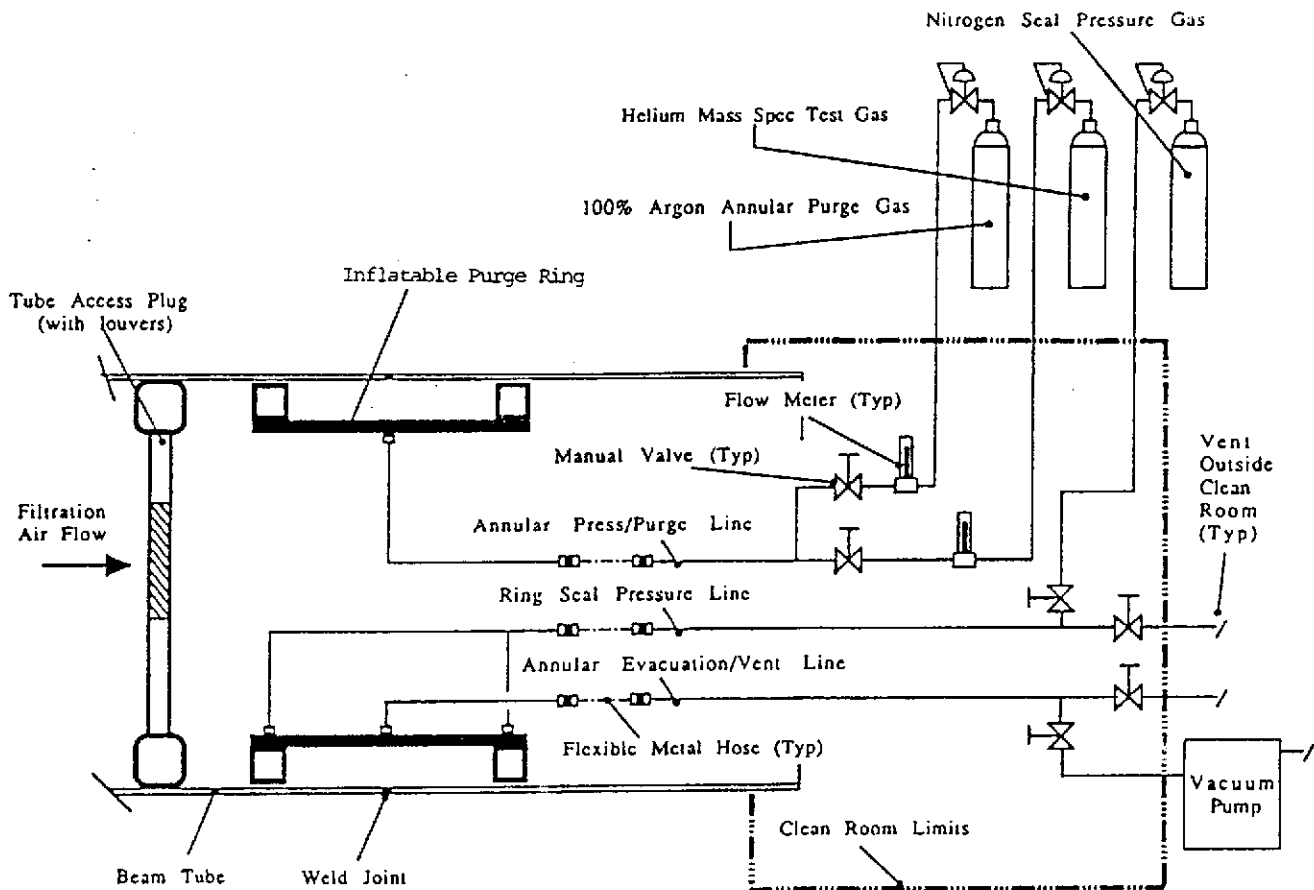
Weld Joint Purging Arrangement
